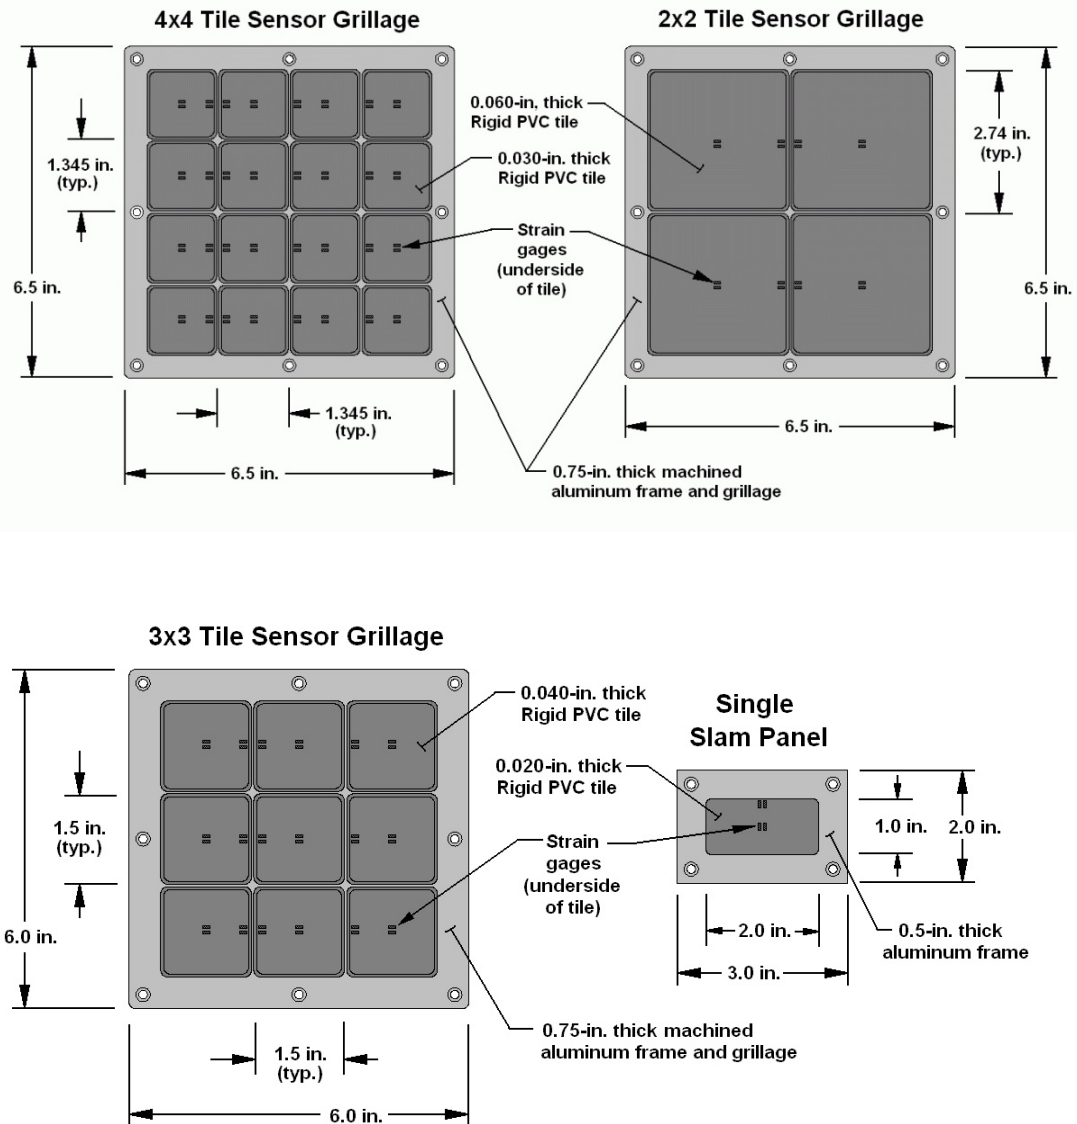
JHSS Slam Grillage and Slam Panel Configuration Details
